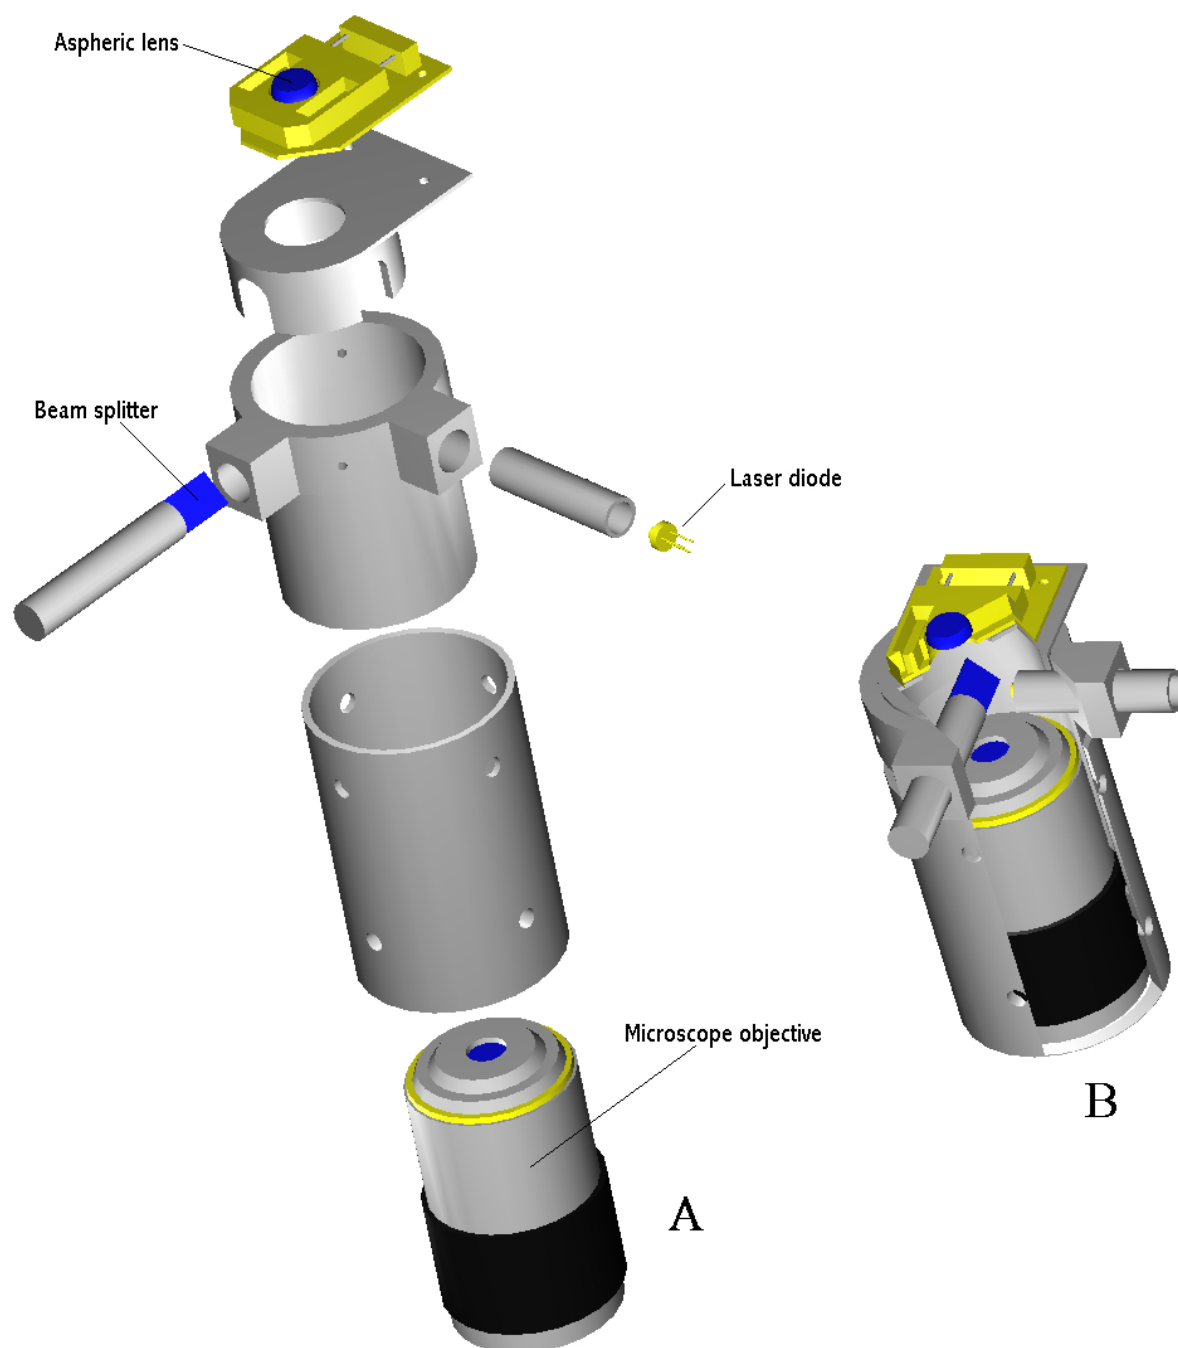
CAD rendering of the compact optical tweezers. (A) exploded view, (B) comprehensive view.
